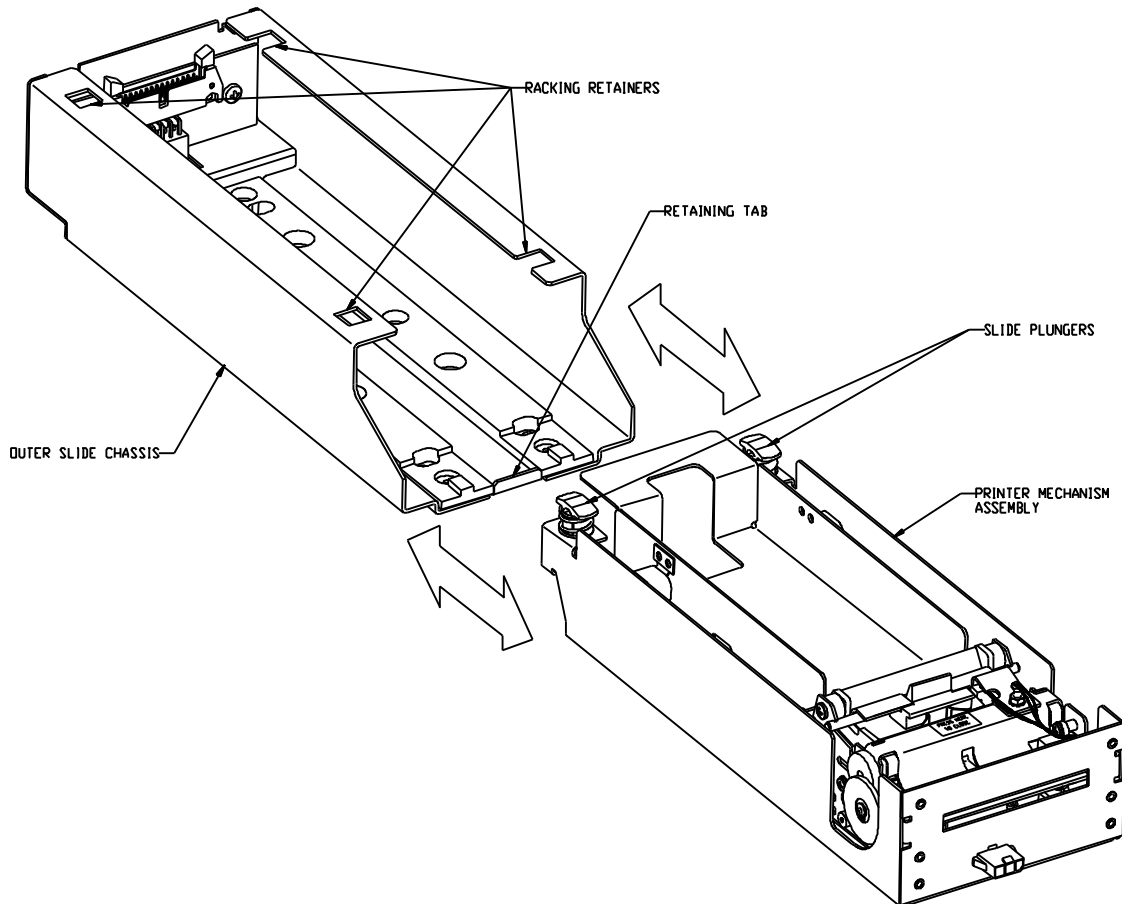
Racking/Unracking the Printer Mechanism Assembly
